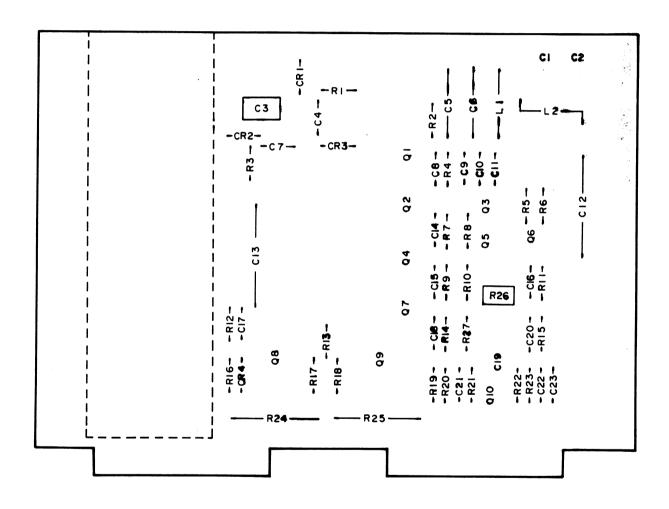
Al Sampling Pulse Generator Board Assembly Component Locations.
